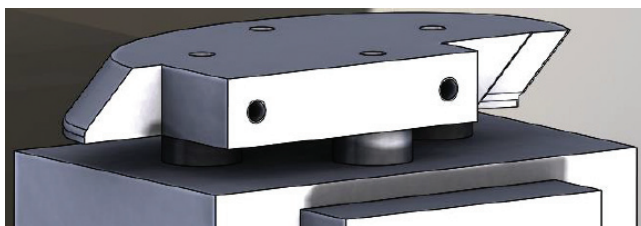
Stamp 1 shaping insert based on bushes with chamfers, fixed with screws to the plate in a vice
